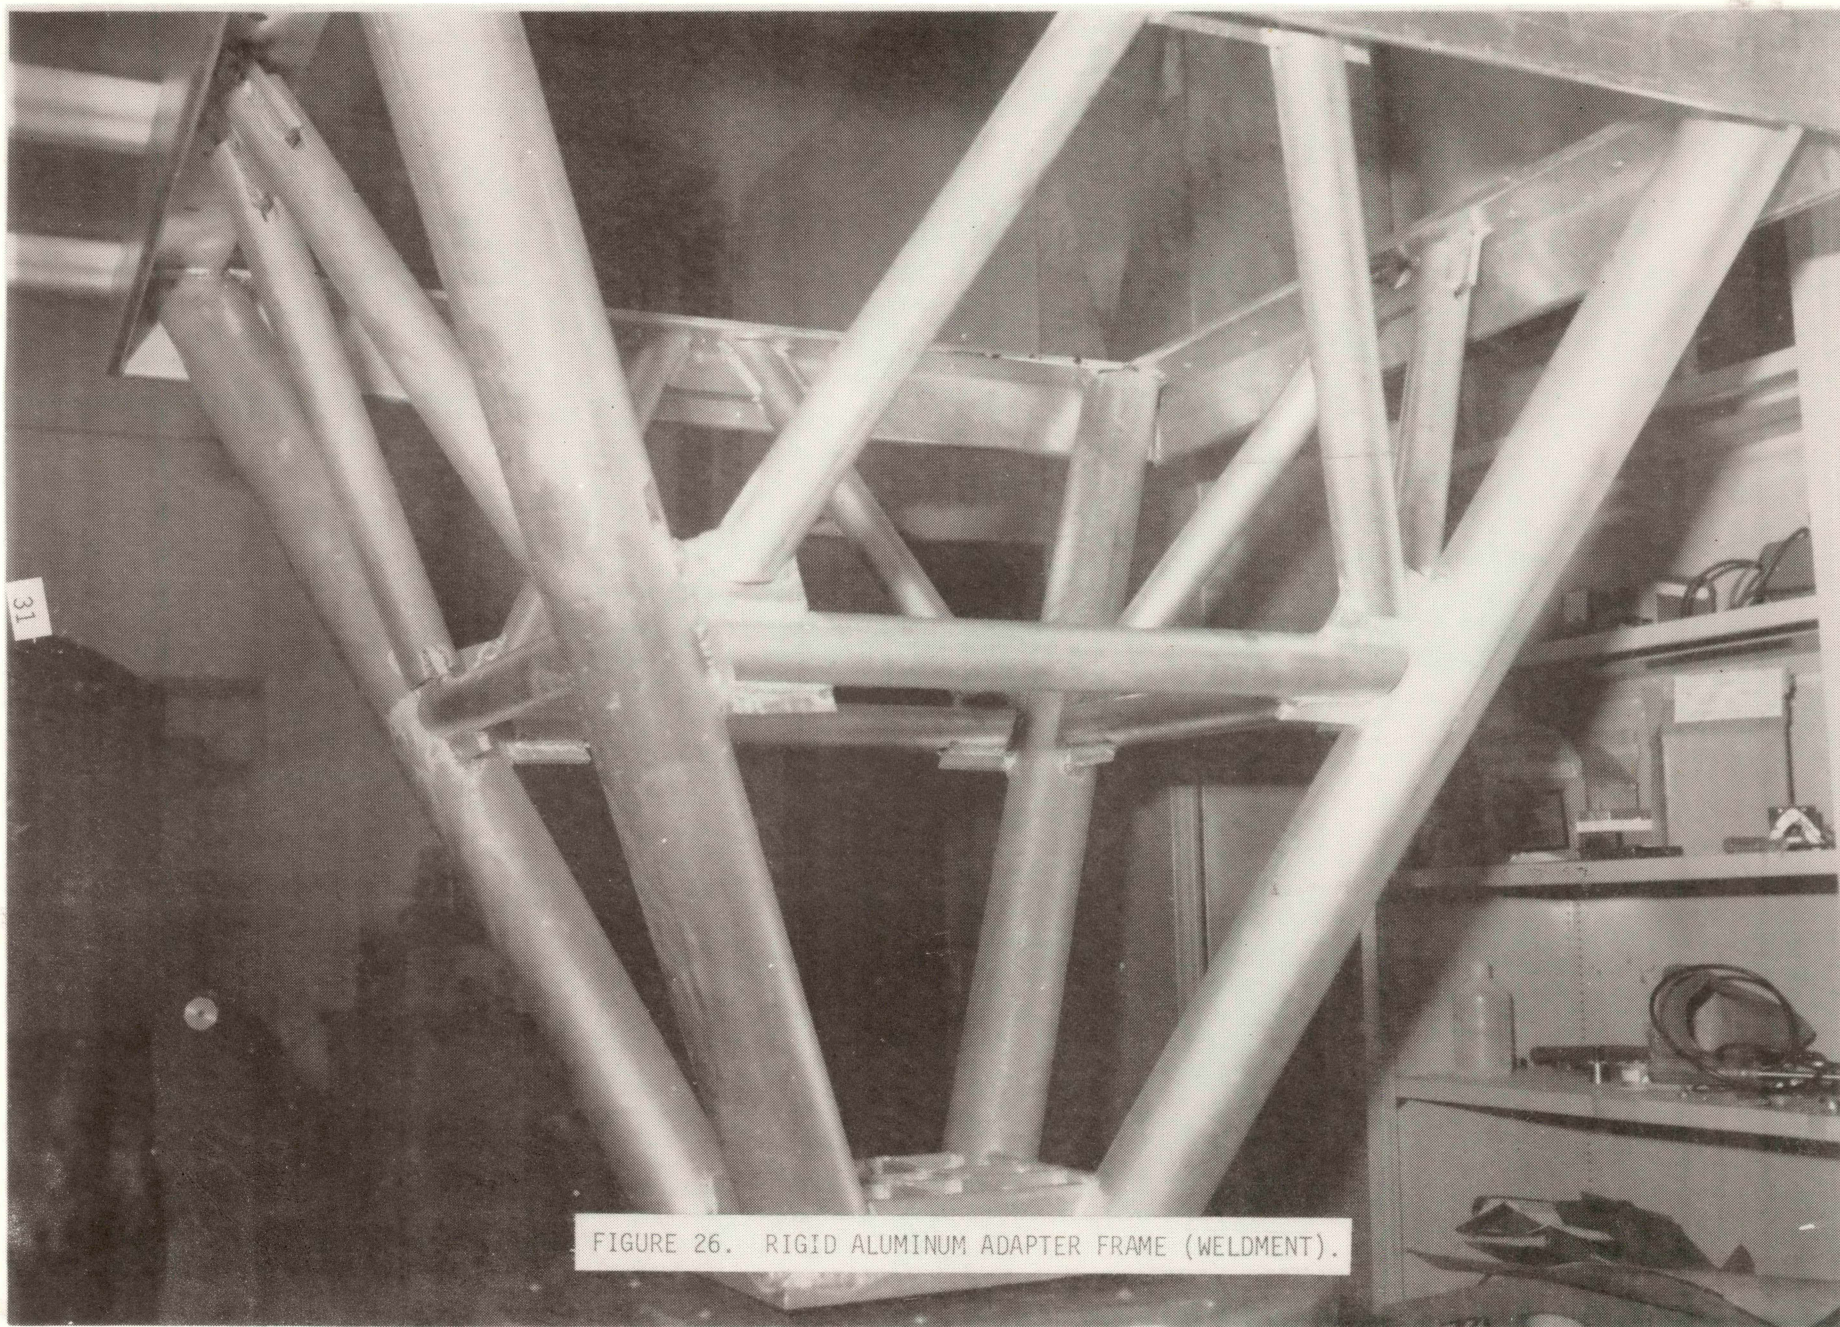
RIGID ALUMINUM ADAPTER FRAME (WELDMENT).
